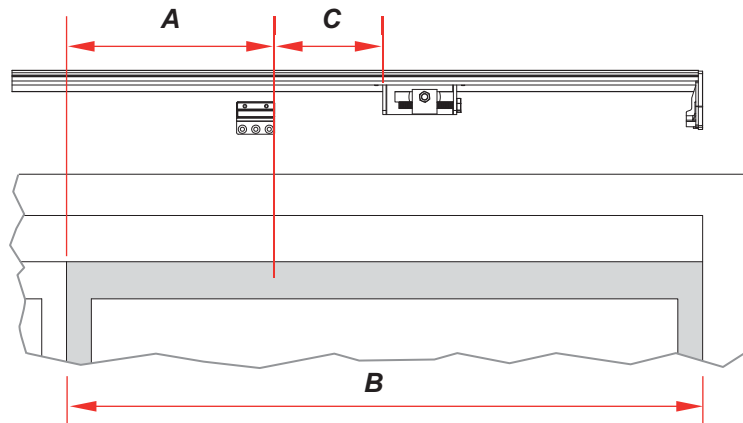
Left-opening sliding door: belt tensioner and bottom bracket. The right side is shown with sliding door closed.
